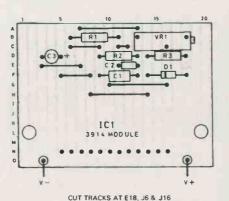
Printed circuit board layout and wiring. Electronics Today May 1987
